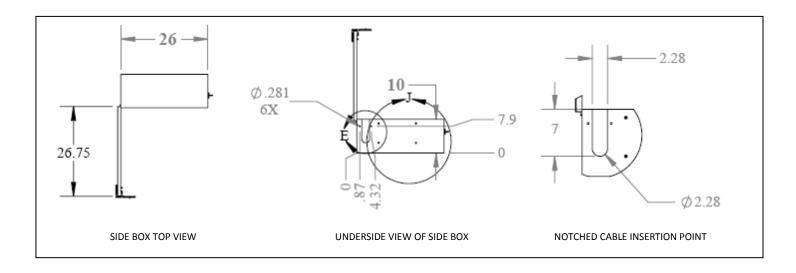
SIDE BOX DETAIL & DIMENSIONS
